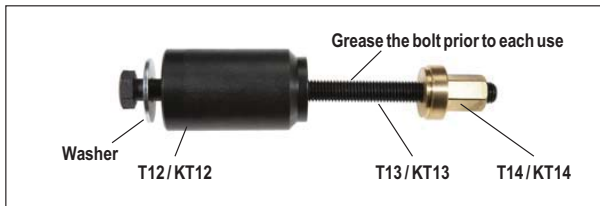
BRASS BUSHING REMOVAL TOOL
